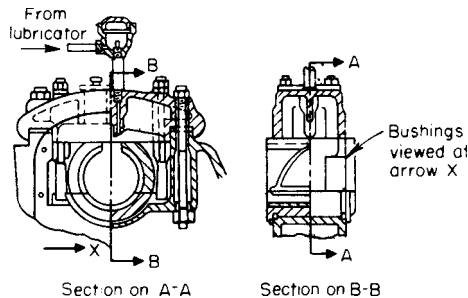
Crankshaft main bearing. Horizontal engine with drop-feed lubrication.
